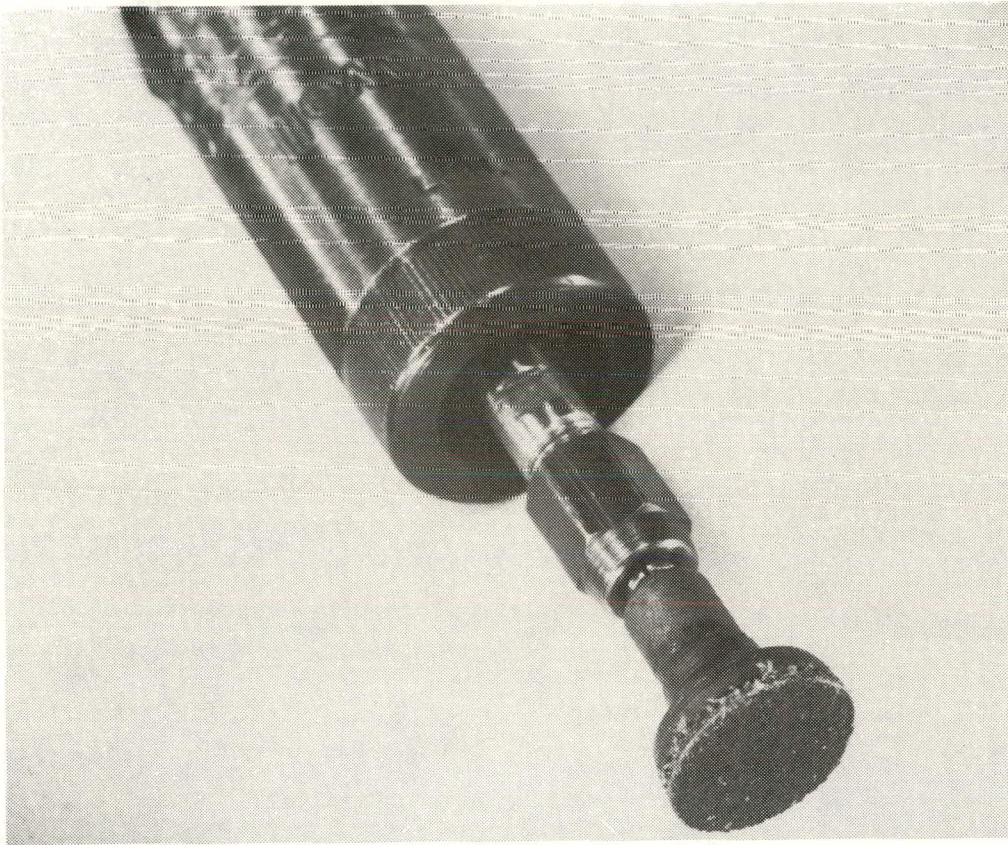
Adhesive Backed Disc Used for Flat Surfaces
